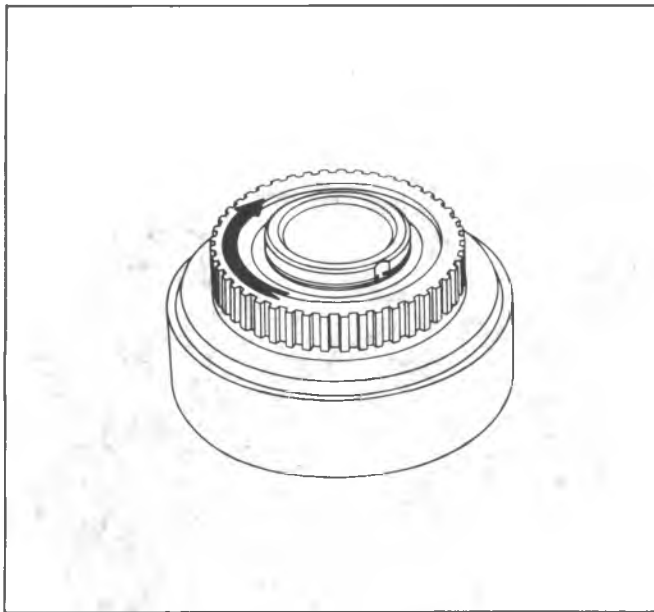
A-108C--Intermediate Roller Clutch Rotation
